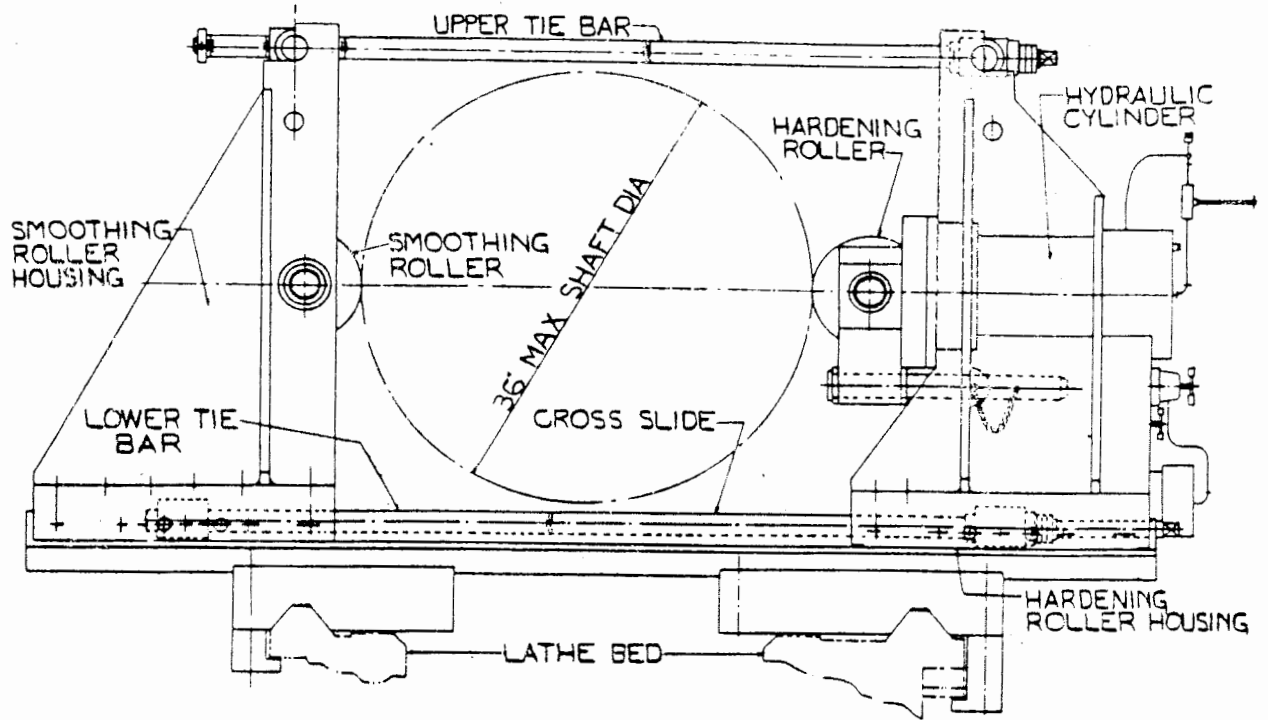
GENERAL ARRANGEMENT OF BETHLEHEM SURFACE COLD ROLLING EQUIPMENT.
